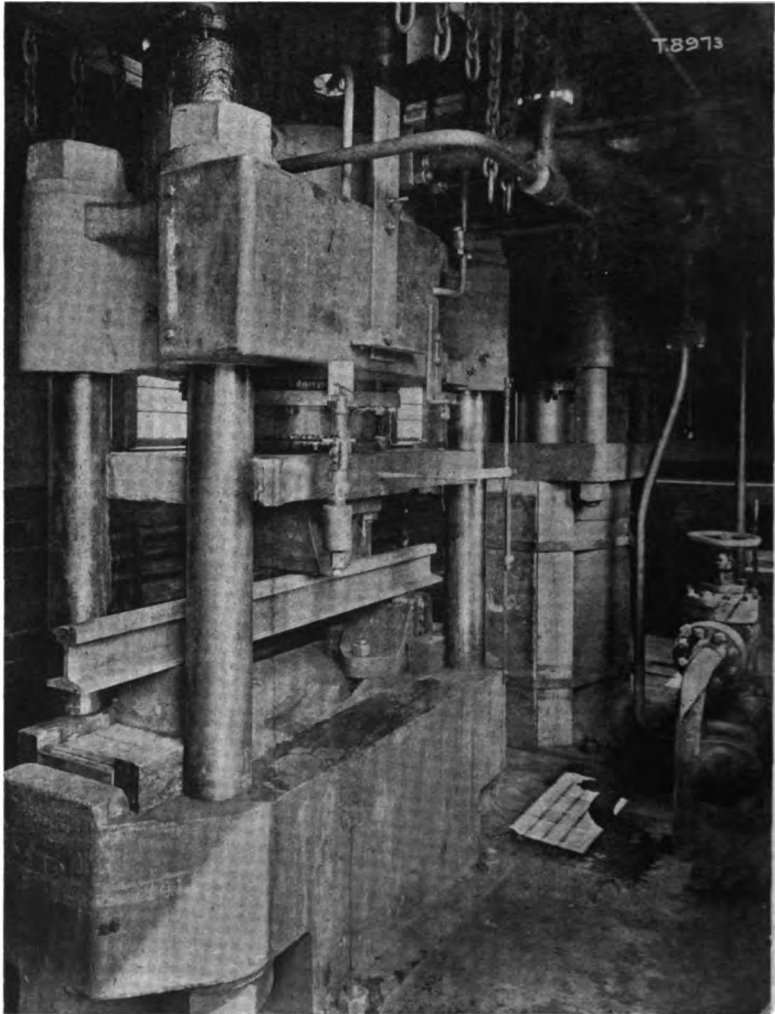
QUICK BEND TEST MACHINE SHOWING RAIL IN POSITION FOR TEST.
